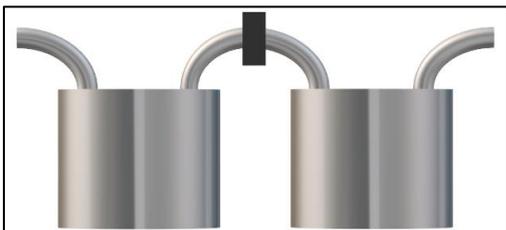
3D Diagram of Modified Compressed Air Engine
